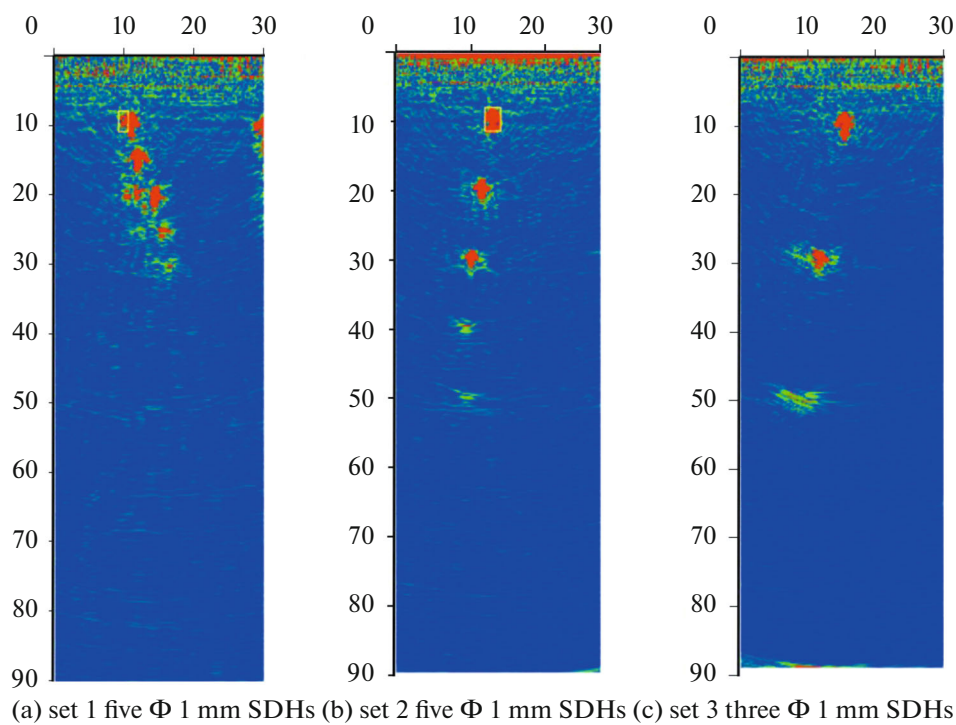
Total focusing method images of SDHs in welding zone and fusion zone.
